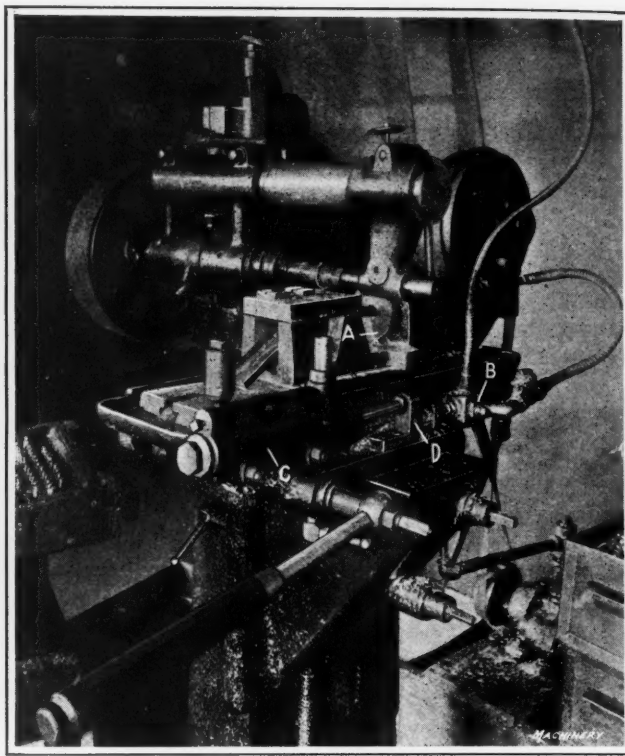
Milling Slot in Firing Pin to receive Spur on Safety Spiral. An Air-operated Work-holding Fixture is provided, and Dashpot C prevents Operator from exceeding Maximum Safe Feed
